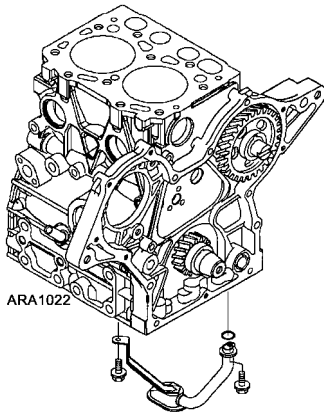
Remove Oil Pump Intake Pipe (Two Cylinder Engine)
